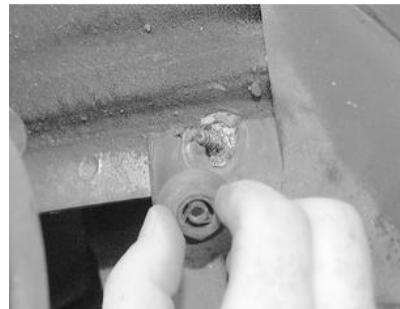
and bend the trim up to access the crankshaft damper
